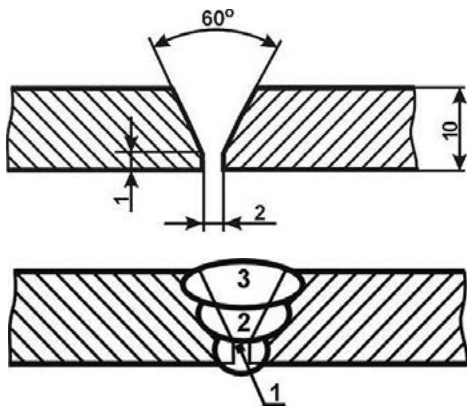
Preparation of elements for welding and welding sequence
